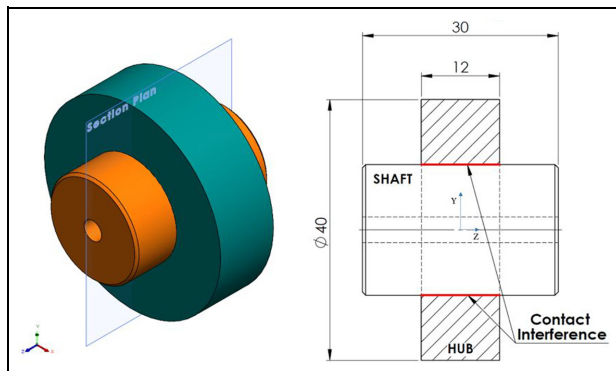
3D model and geometric dimensions (in mm) of the studied assembly.
